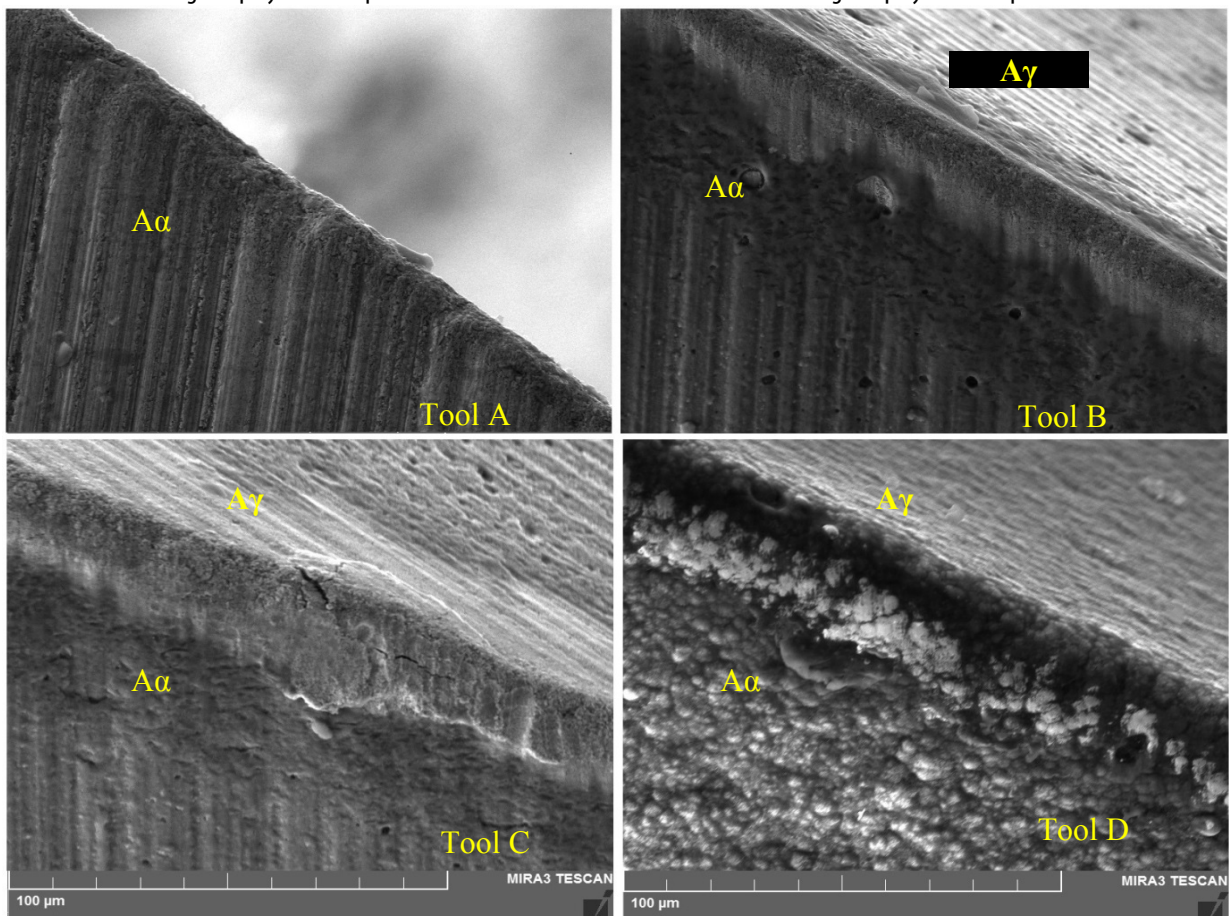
Cutting tools edges magnified on electron microscope TESCAN after experimental machining
